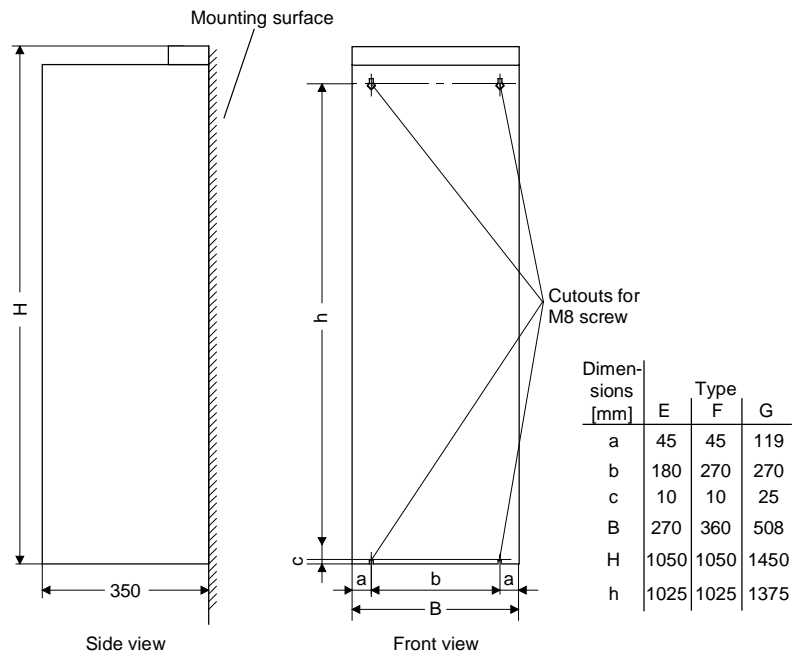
Dimension drawing: AFE inverter, types E, F and G
